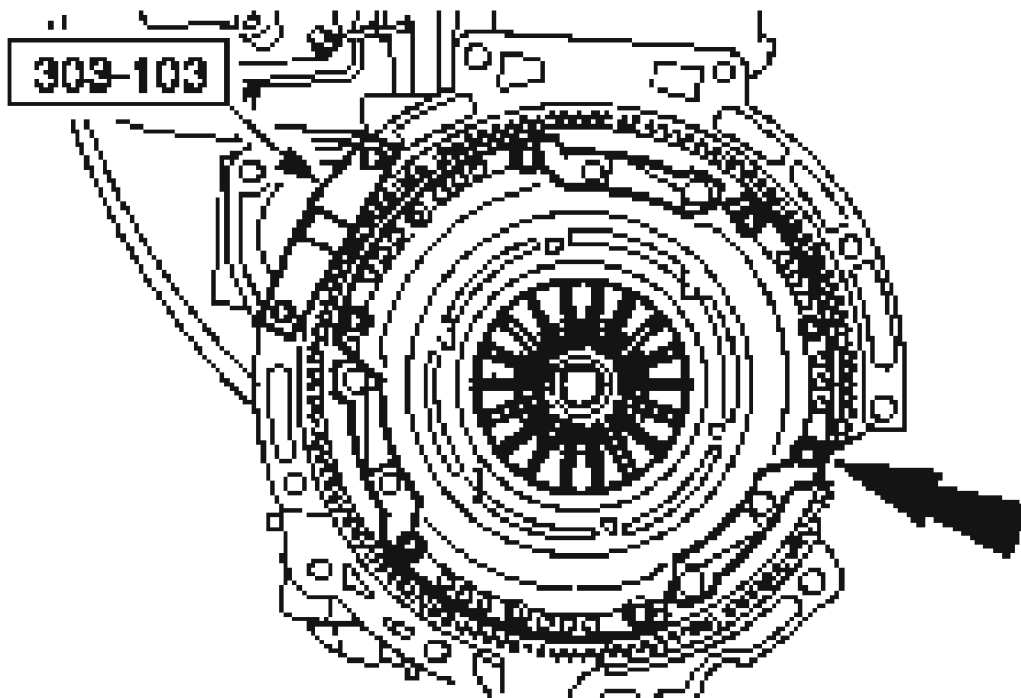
Identifying Clutch Disc And Pressure Plate Special Tool
